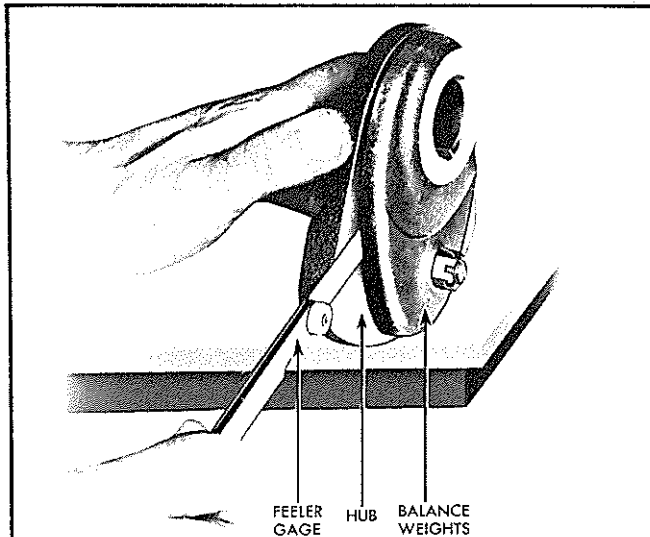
Measuring Clearance Between Balance Weight and Hub
